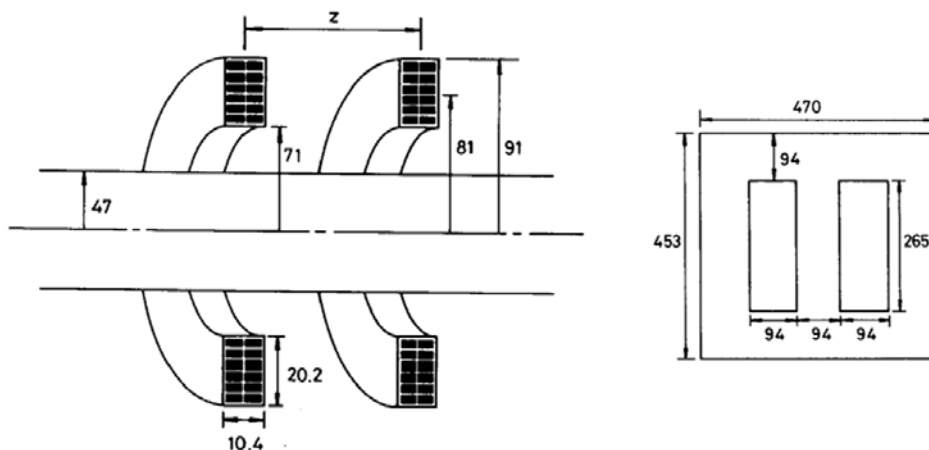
Dimensions in millimetres of the 25kVA test object used by Wilcox [46]. Double-disc dimensions to the left. Core dimensions to the right.
